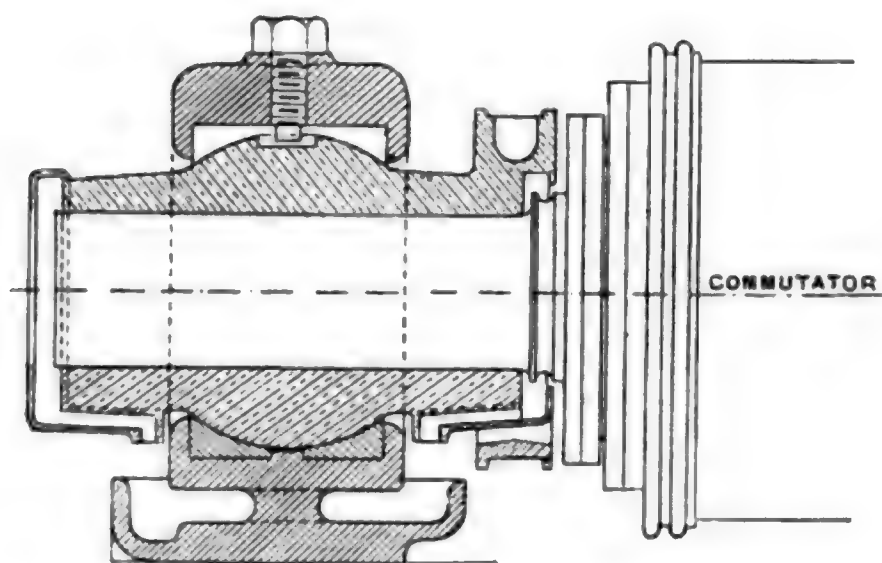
SPHERICAL BEARING OF GOOLDEN DYNAMO.
